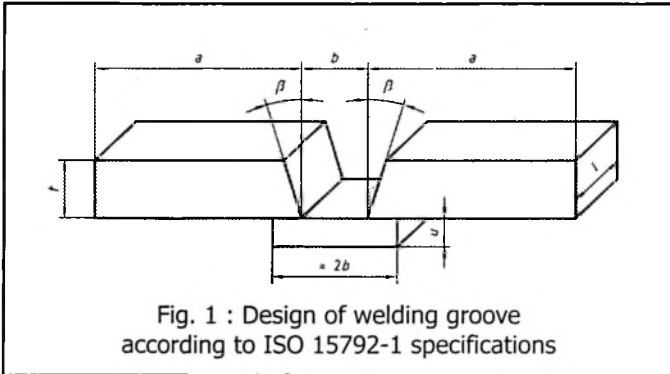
Design of welding groove according to ISO 15792-1 specifications
